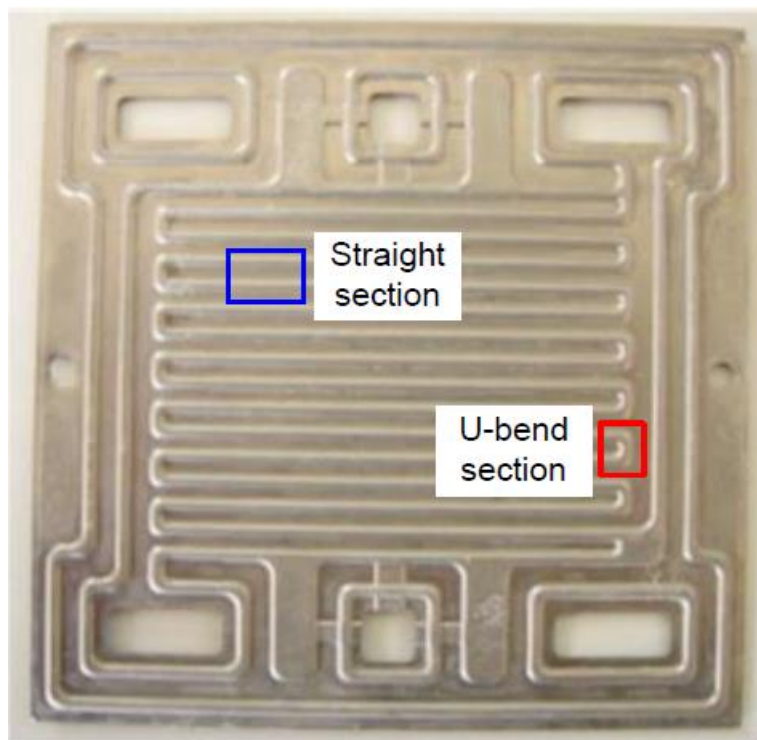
Sheet metal geometry in the conventional stamping for several channels.
